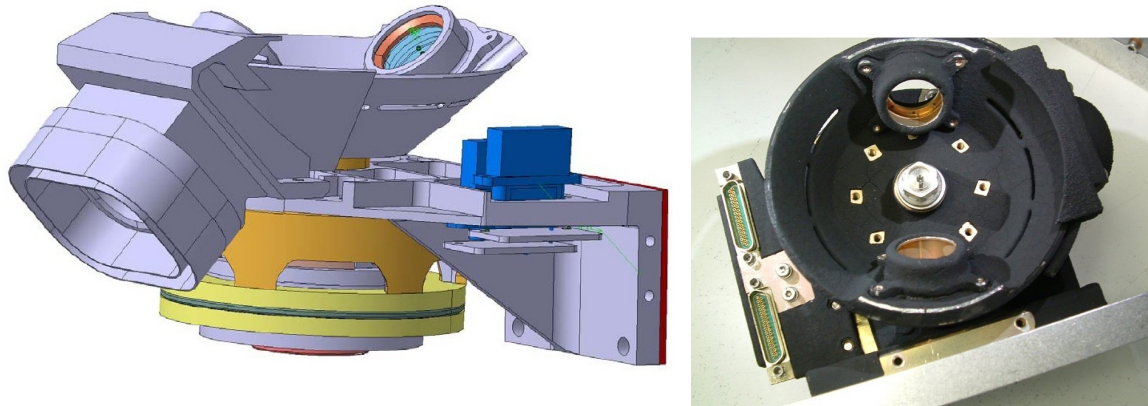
PACS filter wheel assembly. Left: Design of the filter wheel, showing the disk with the two filter positions and the magnetic motor drive underneath. Right: Image of a flight model filter wheel coated with black paint.
